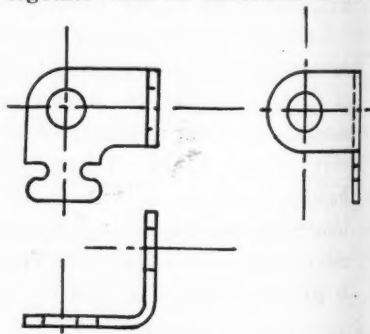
Drawing, double size, of part blanked and formed in dies described in this article.
